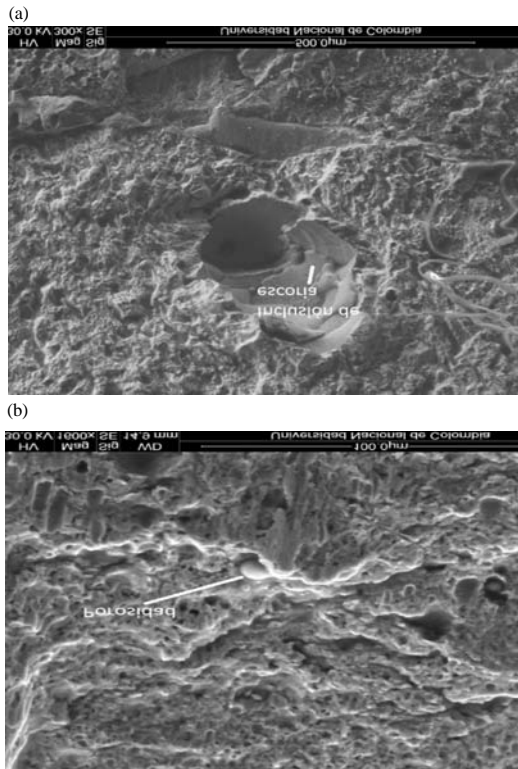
Discontinuities type: a) Slag line and b) Porosity observed on the welded specimen BB7
